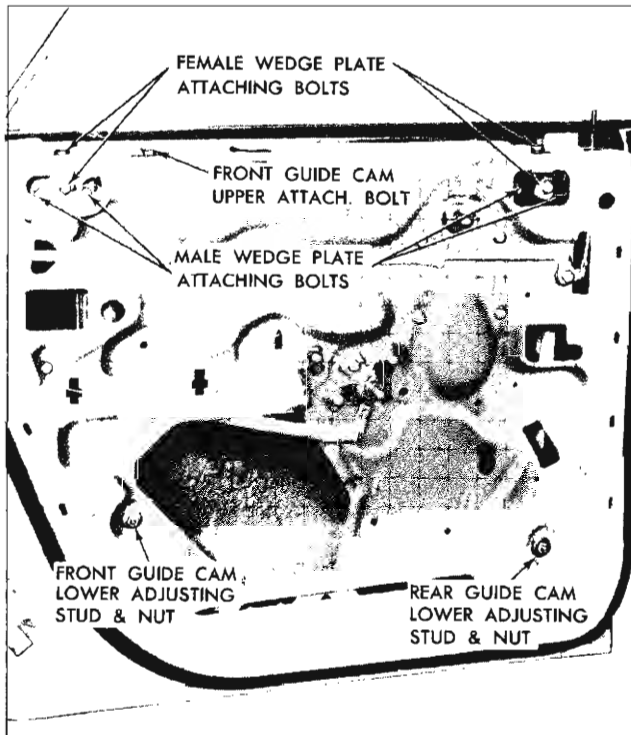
Guide Cam and Wedge Plate Attachments
